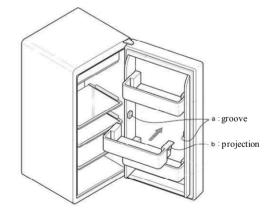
Installation parts (groove and projection) of refrigerator half-guard
